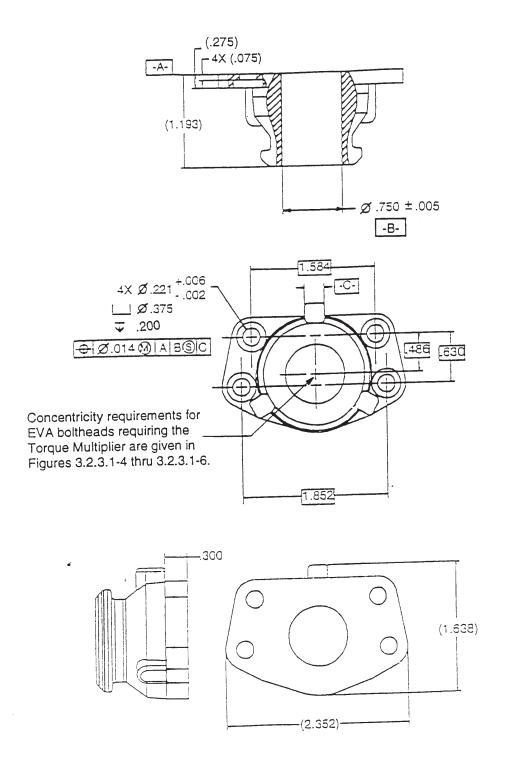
0006056 MICROCONICAL FITTING BOLTHOLE PATTERN AND FOOTPRINT
